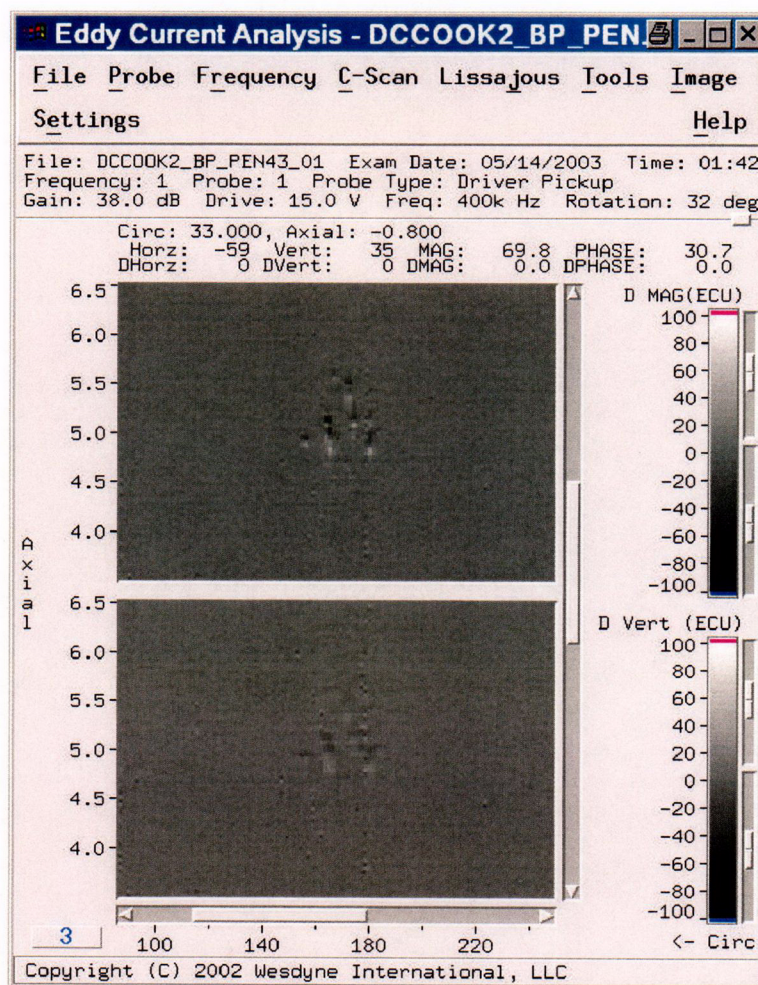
PENETRATION TUBE OD FLAW EVALUATION
